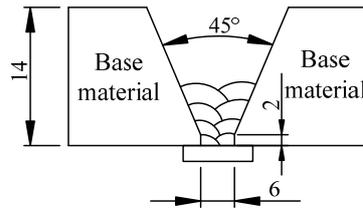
The V-shaped Groove Weld used in this Investigation
